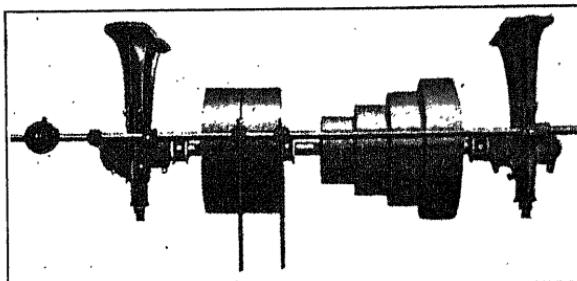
Tight and loose pulleys on a countershaft. Also a stepped cone pulley. Dodge Sales & Engineering Co., Mishawaka, Ind.
